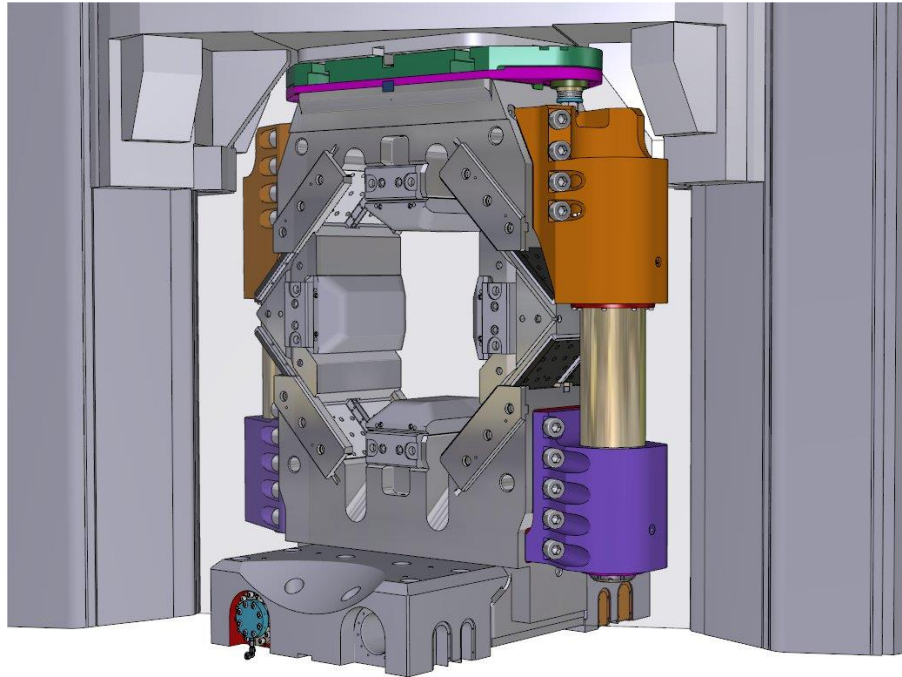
Design of FDFD to produce the forgings with the rectangular cross-section
